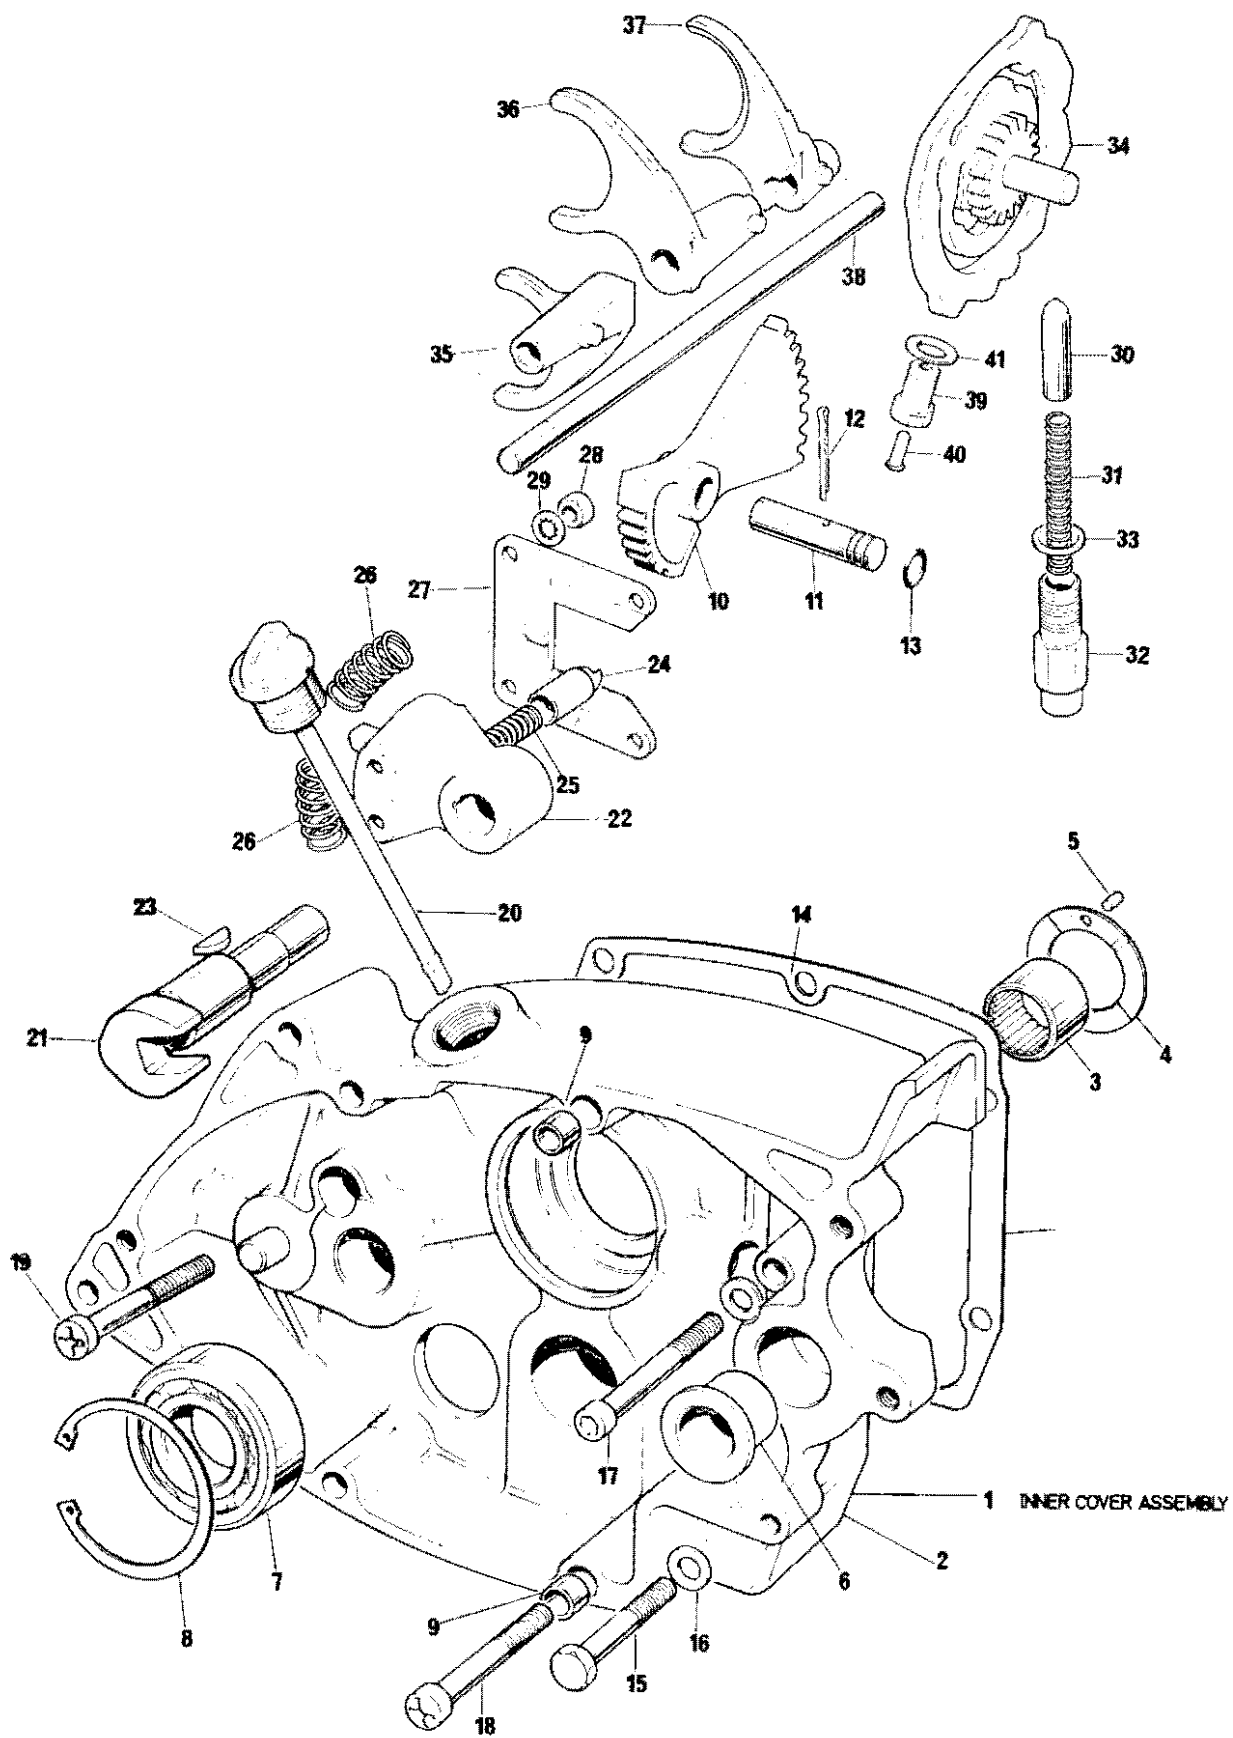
TRANSMISSION (GEARBOX) INNER COVER AND GEARSHIFT MECHANISM
